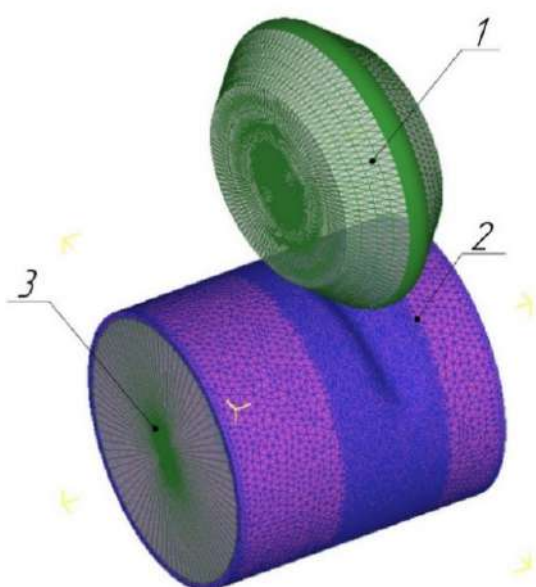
Model of the roller spinning process of a spiral tube : 1 – roller, 2 – tube, 3 – mandrel
